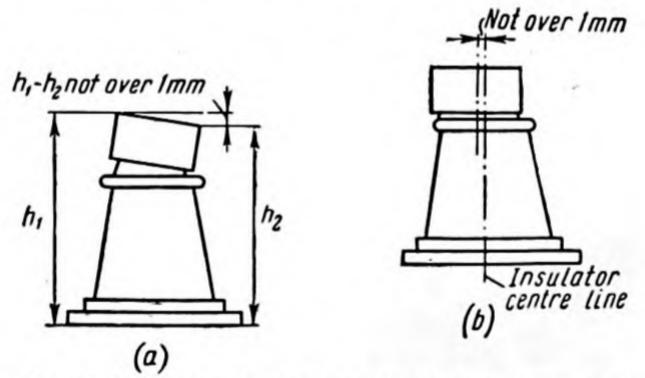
Tolerances on lack of parallelism between cap and base, and on offset of cap or base from insulator axis
